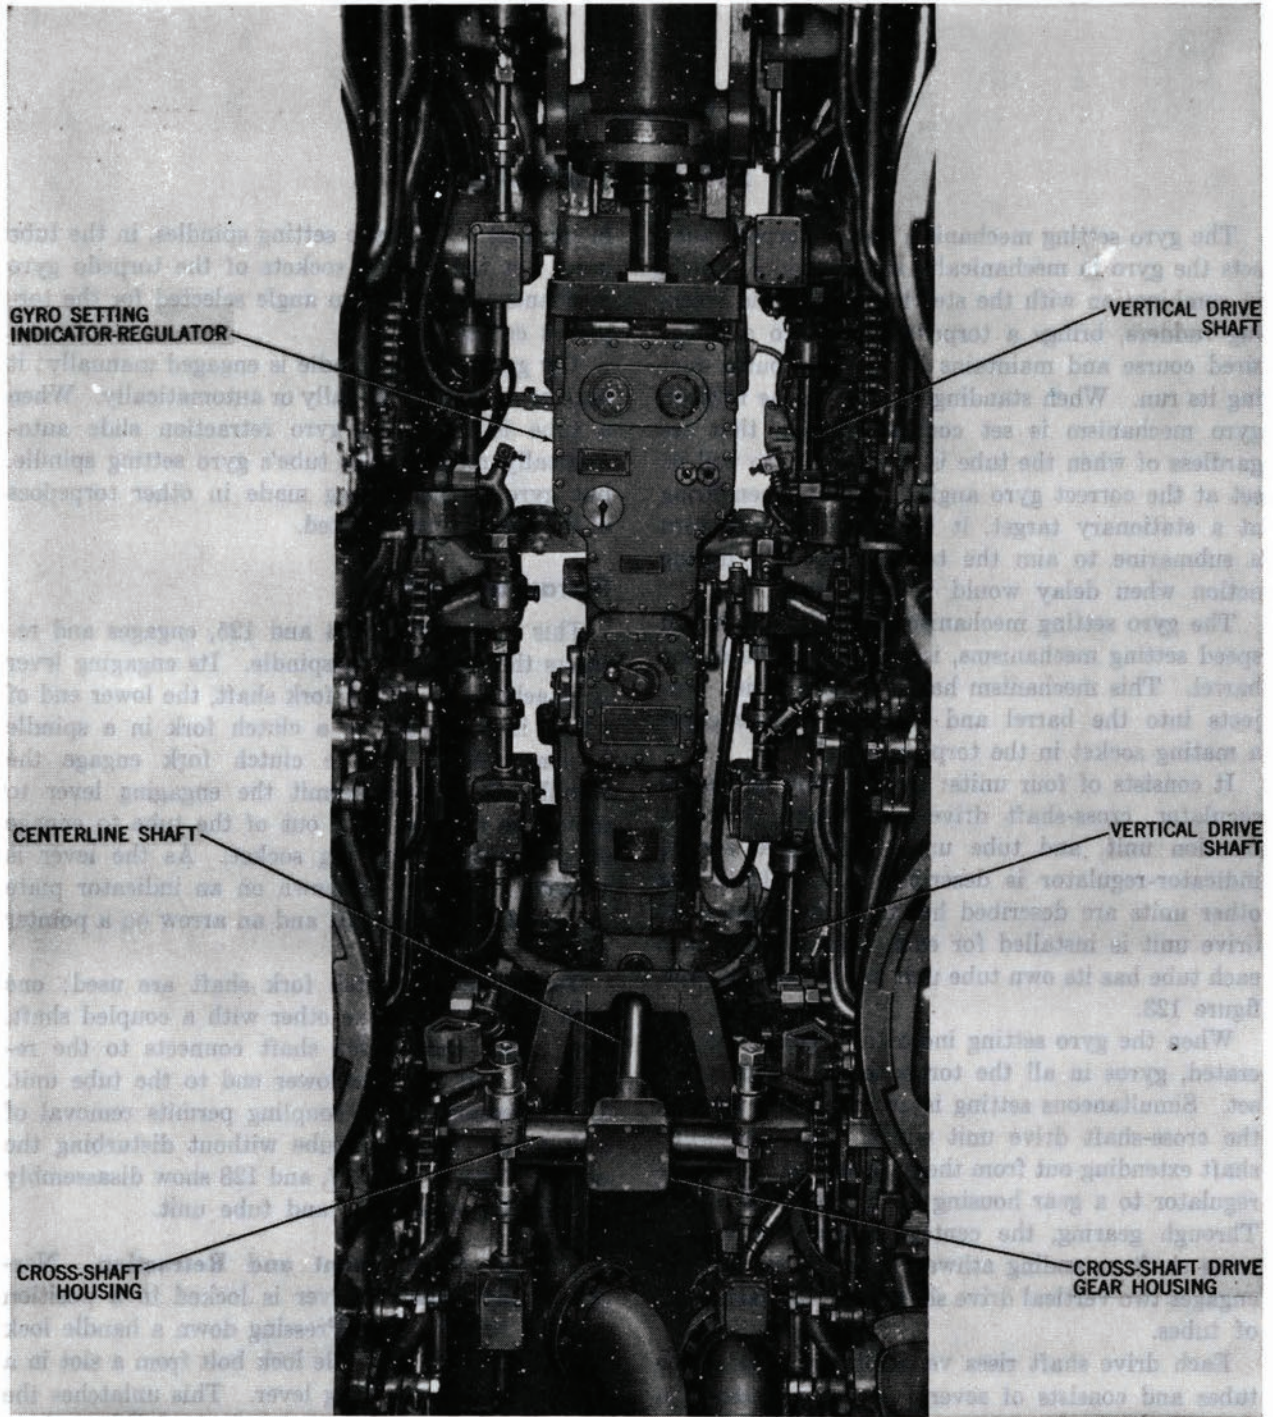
Gyro Setting Mechanism—Cross Shaft Drive Unit.
